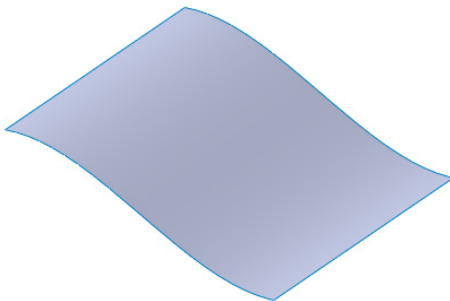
Untrimmed surface created by selecting the Extend edges radio button
